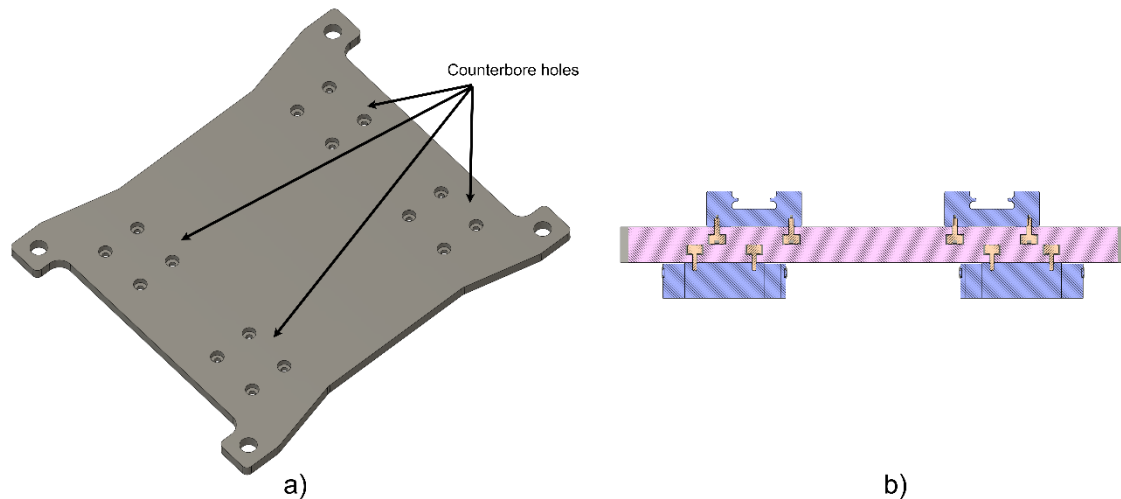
a) XY gantry plate with the marked linear rail carriage holes, where counterbore holes will be machined, b) Section view of the plate with the linear rail carriages mounted with M3 screw embedded in the plates.
